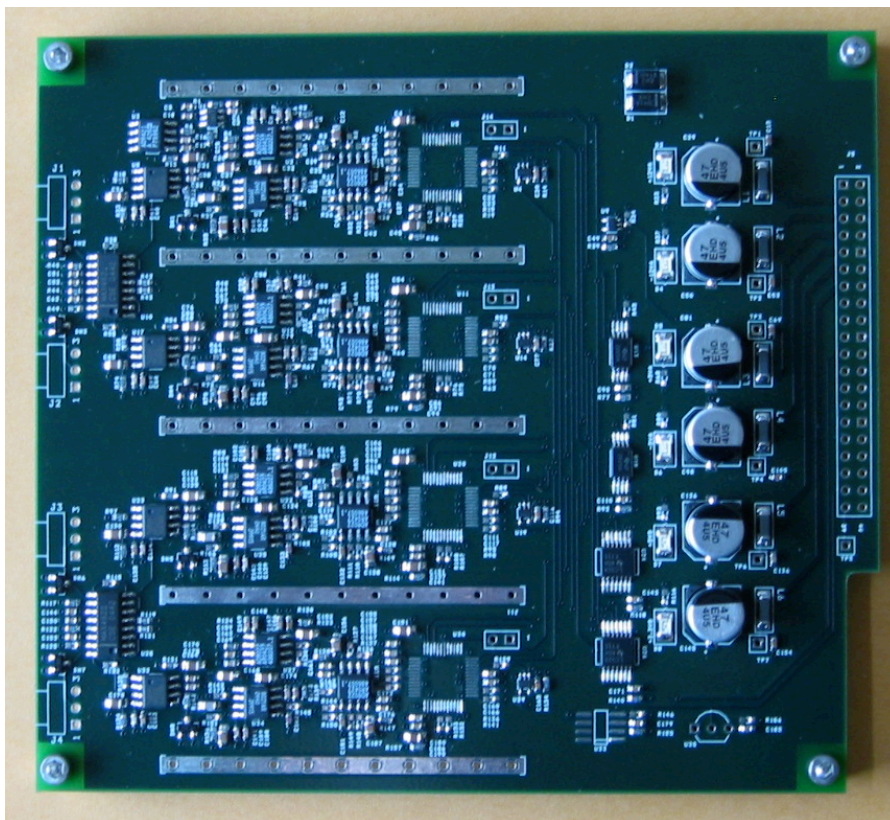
UXO4CH Board Photograph (not fully assembled)
